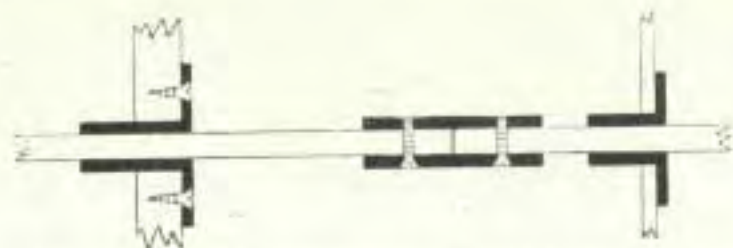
CONNECTION BETWEEN PADDLER'S MAIN-SHAFT AND EXTENSION DRIVING SHAFT
